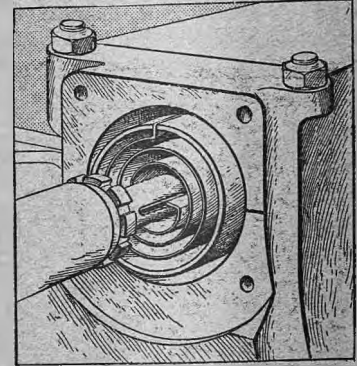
The spring drive of the water pump of the 12-14 h.p. F.N.
